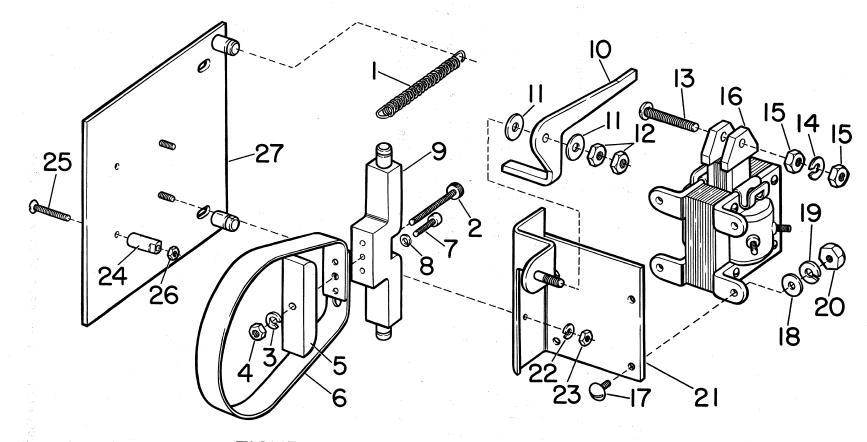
502 296 00 AND 502 297 00 LEFT AND RIGHT SIDE BRAKE ASSEMBLIES-EXPLODED VIEW
